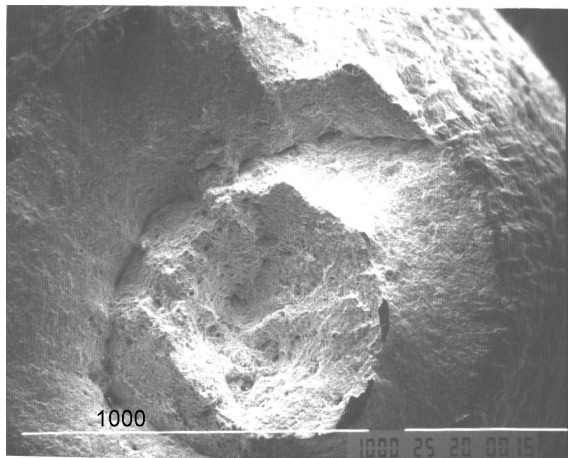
Fracture surface of the irradiated powder HIPed steel, tensile specimen 4D6. SEM.
